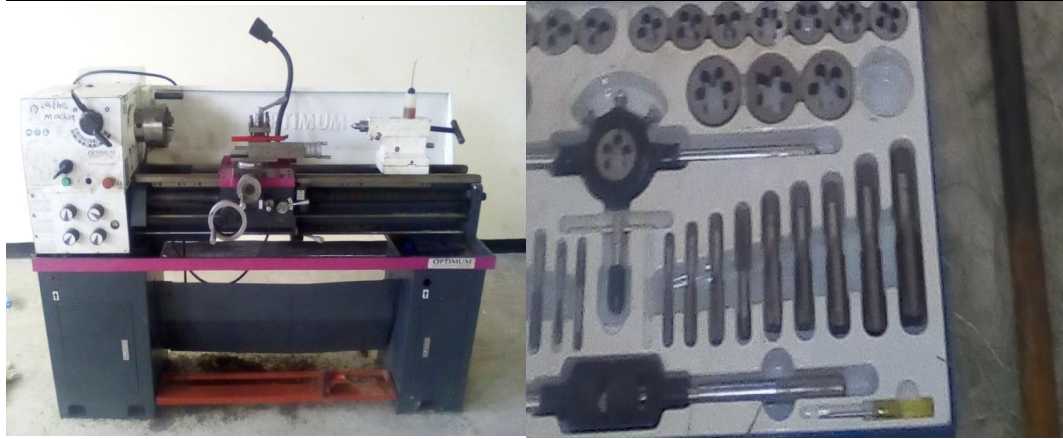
Lath Machine with Internal and external threader (Photo Mechanical Lap from Debre Brhan University)
